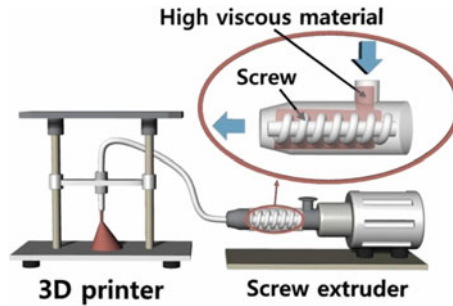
Schematic of Screw type extrusion with 3D printer, Reprinted from *Ceram. Int.* 45, Kim, N. P., Cho, D., Zielewski, M., Optimization of 3D printing parameters of Screw Type Extrusion (STE) for ceramics using the Taguchi method, pp. 2351–2360. Copyright (2019), with permission from Elsevier [47]
